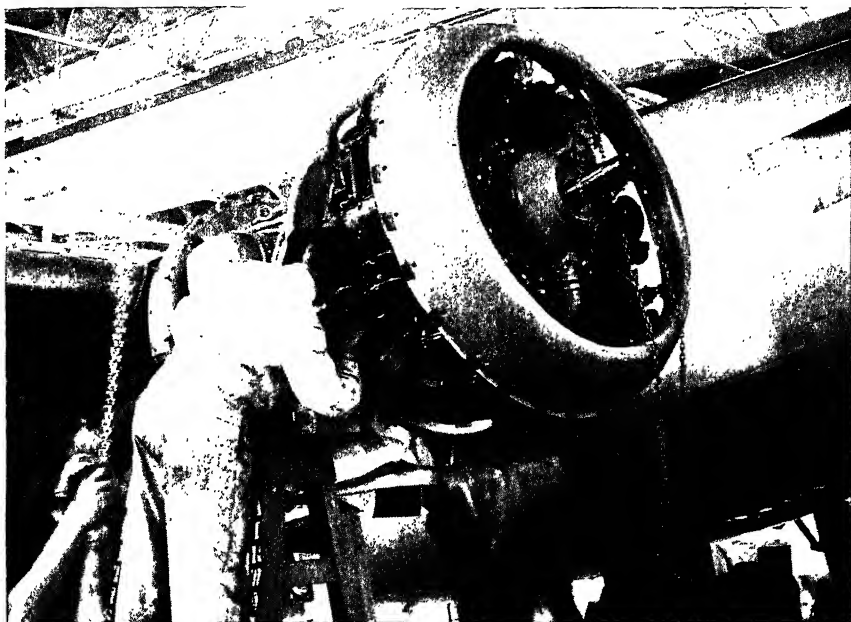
INSTALLING AN ENGINE ASSEMBLY IN STARBOARD MOUNTING
